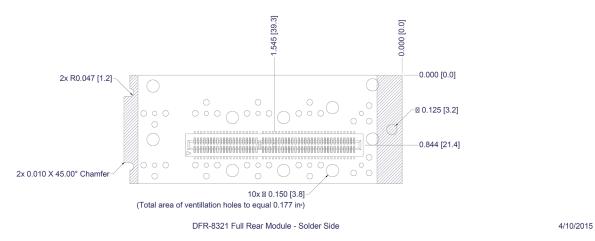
DFR-8321 Full Rear Module — Solder Side
